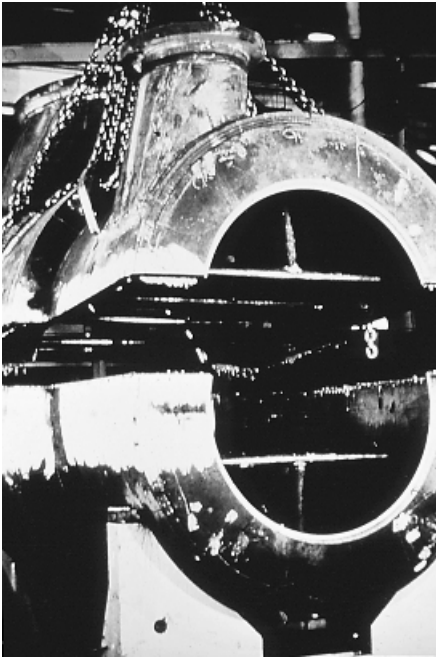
Longitudinal splitting of a compressor casing. (*Dresser-Rand Company, Olean, N.Y.*)
